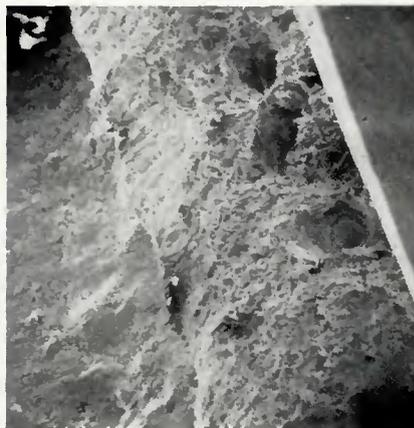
Fracture face of laser weld showing root porosity.  $\times 70$  (reduced 50% on reproduction)
